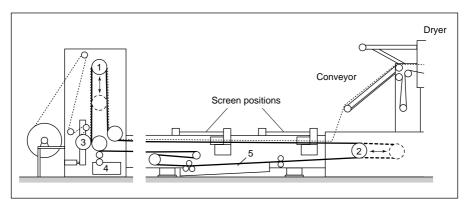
Fully automatic flat-screen printing machine (simplified diagram); rollers 1 and 2 move as shown, to maintain the lower side of the blanket in constant motion, 3 is the pressure roller, 4 the temporary adhesive application unit and 5 the blanket washer (Buser)
